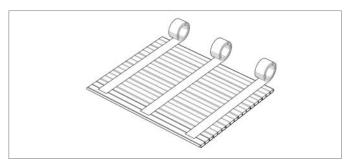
Tambour door carpet of 8 mm tambour door profiles with adhesive tape on back
